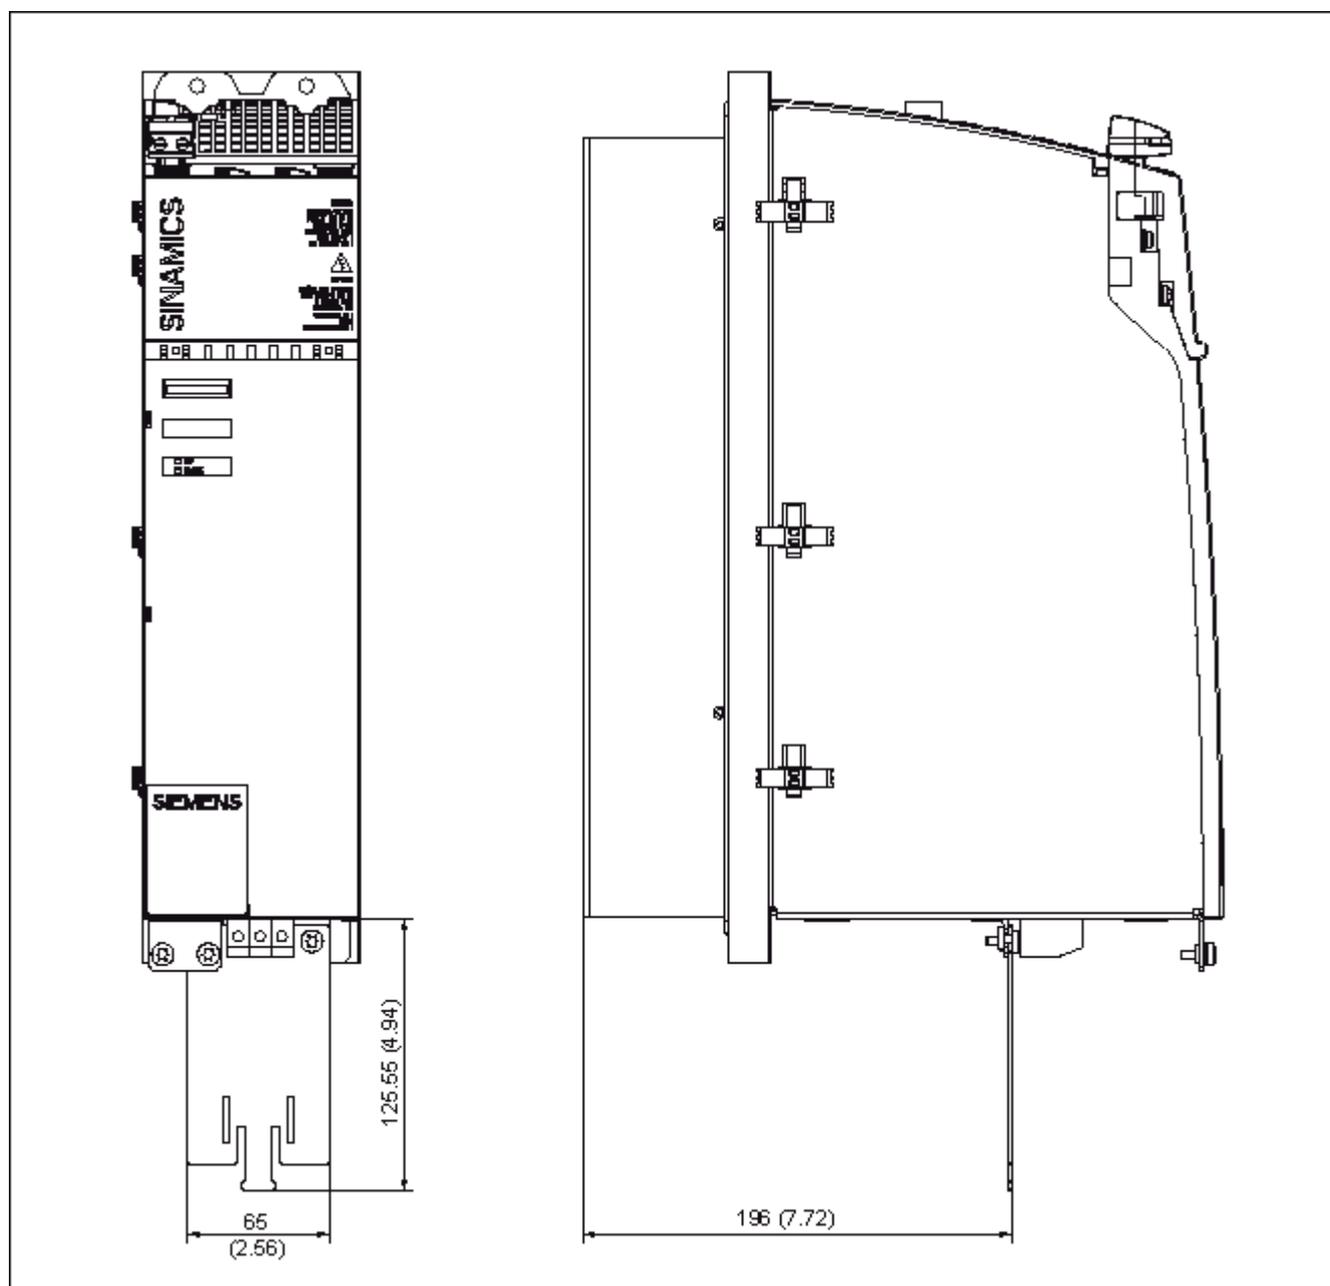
Dimension drawing of shield connecting plate on a 100 mm component with external air cooling, all dimensions in mm and (inches)
